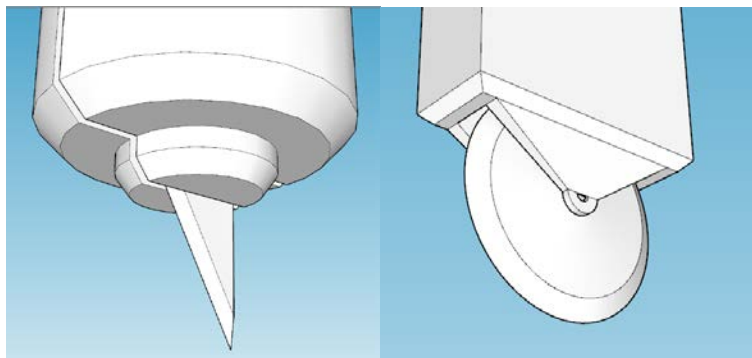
Basic geometry of one type of drag knife (left), and a rotary blade (right).
